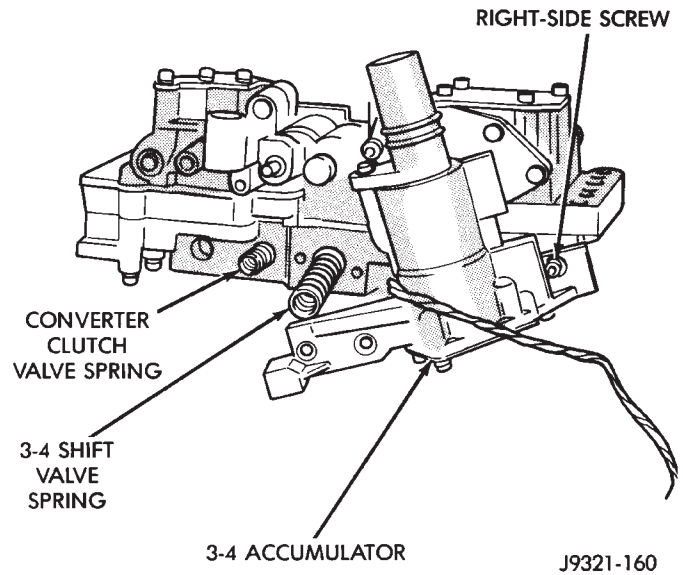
Converter Clutch And 3-4 Shift Valve Springs
